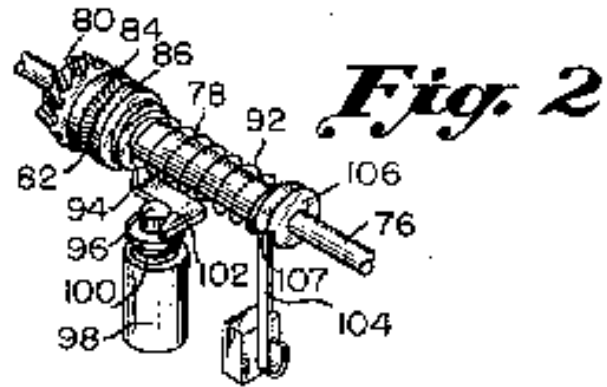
is a detail perspective View of the positive cyclic clutch mechanism which can be seen below the typewheel in FIGURE 1 and which controls the camshaft cycles of rotation, the length being exaggerated for purposes of clarity.
